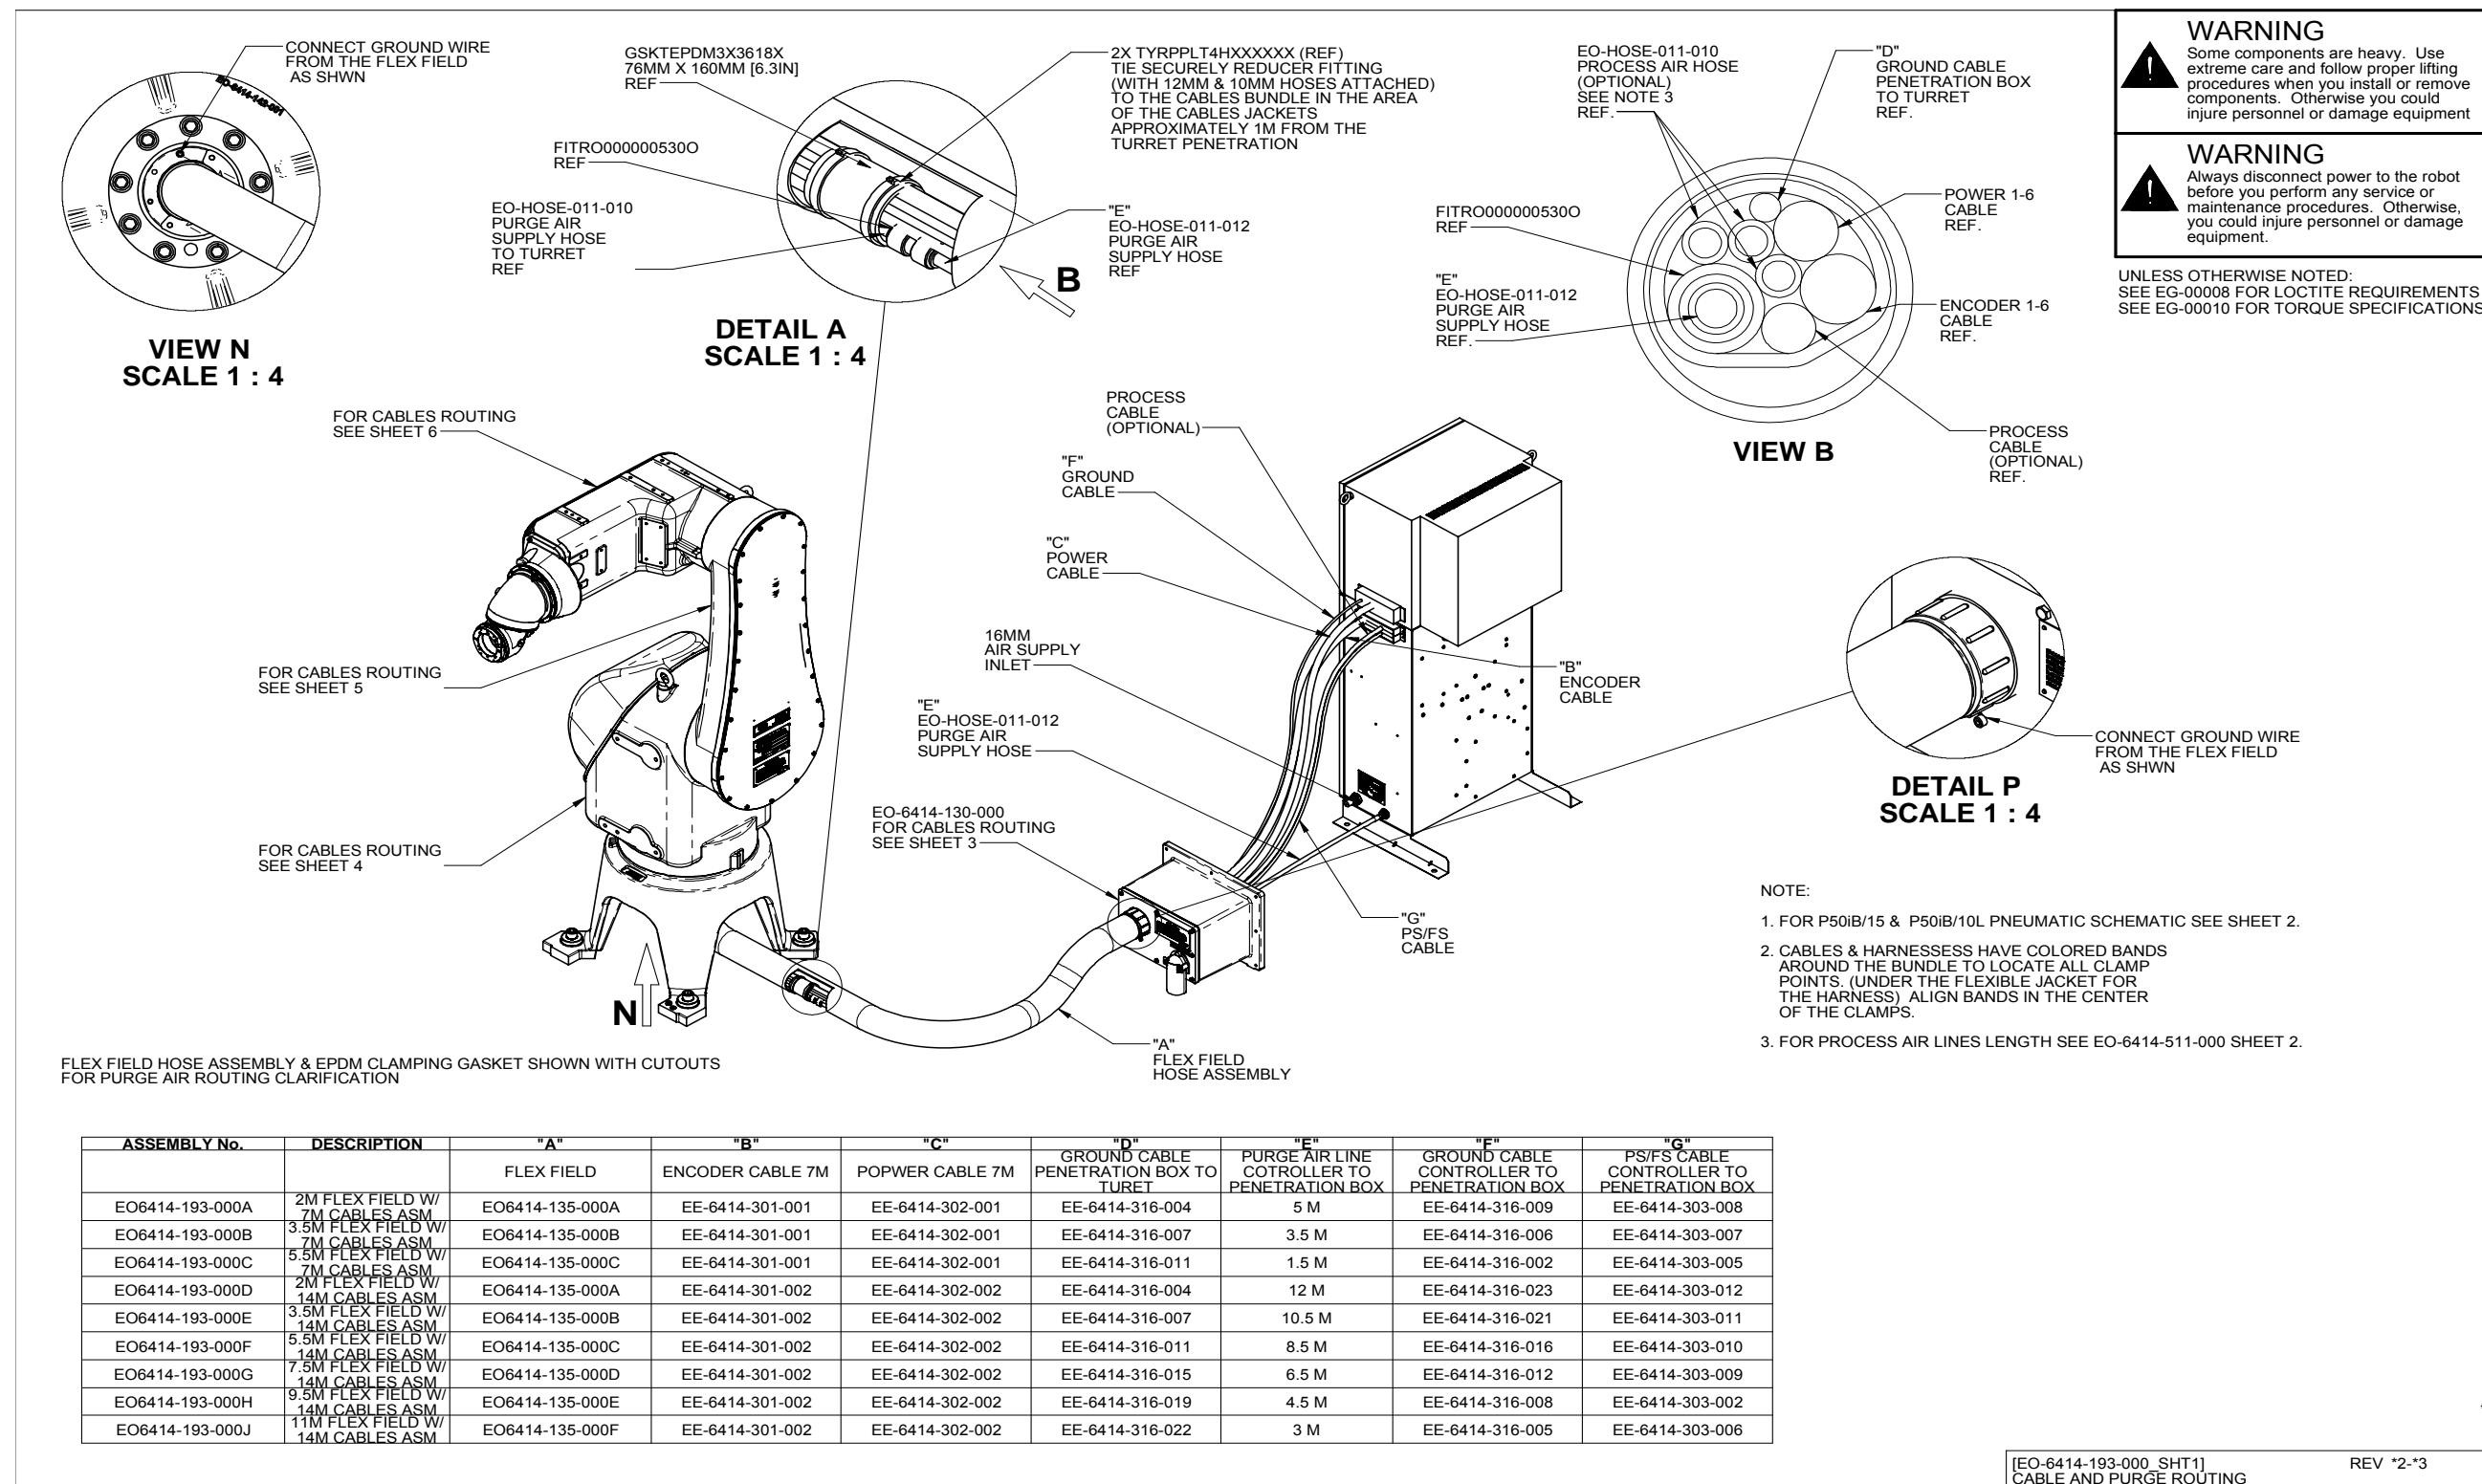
EO-6414-193-000 SHT1, CABLE AND PURGE ROUTING
